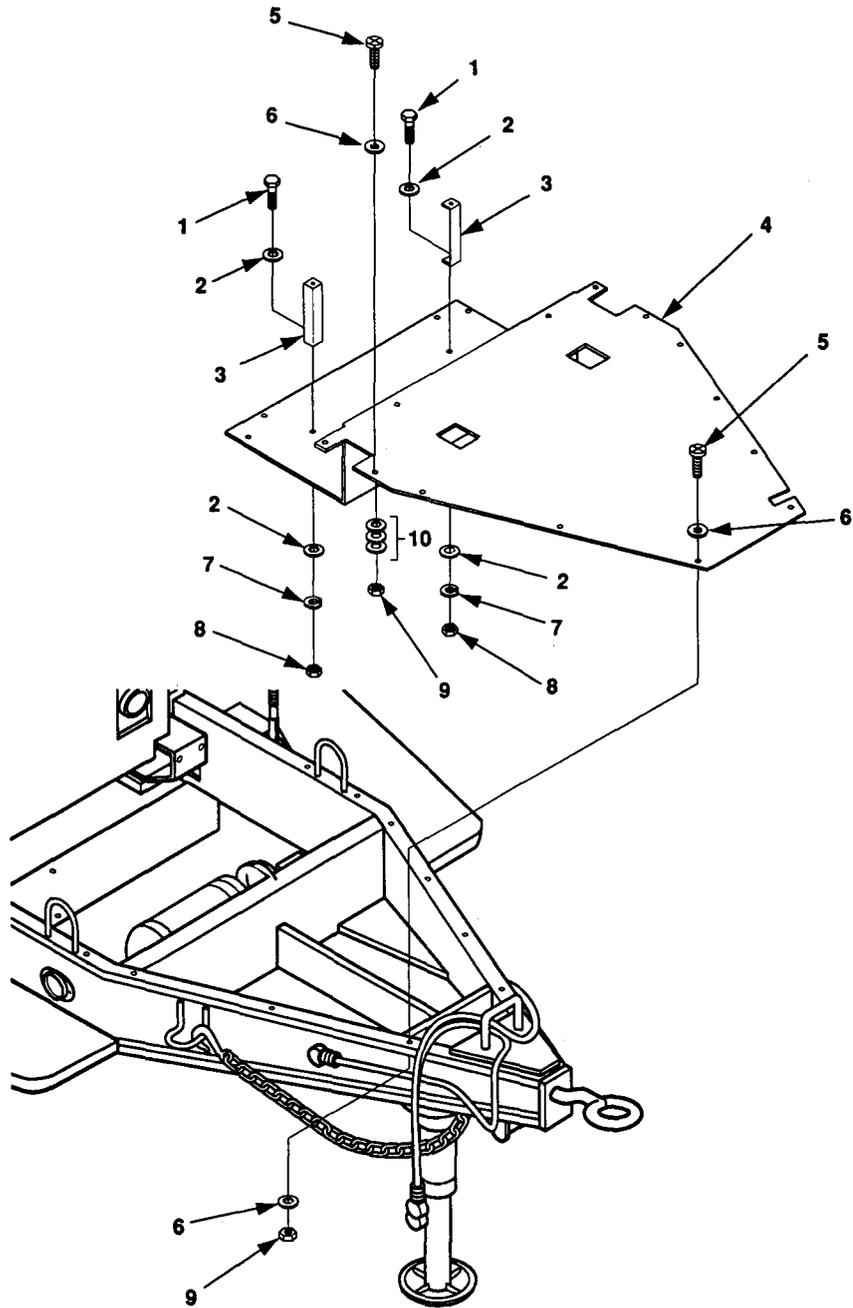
Front Platform Replacement, 2 1/2 Ton Trailer.
